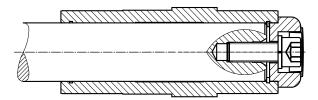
Gear unit mounted to shaft without a shoulder using the fastening element
